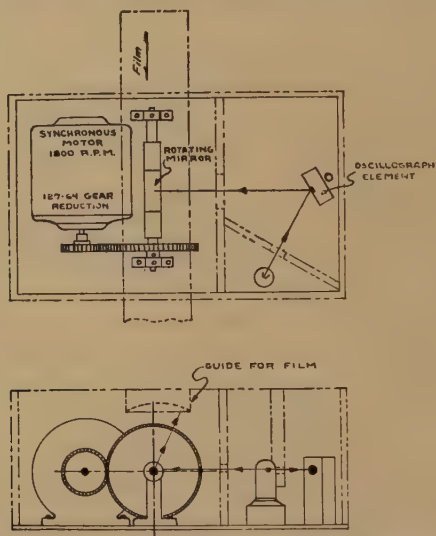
Drawing of assembly of recorder with film drive and film container omitted.
